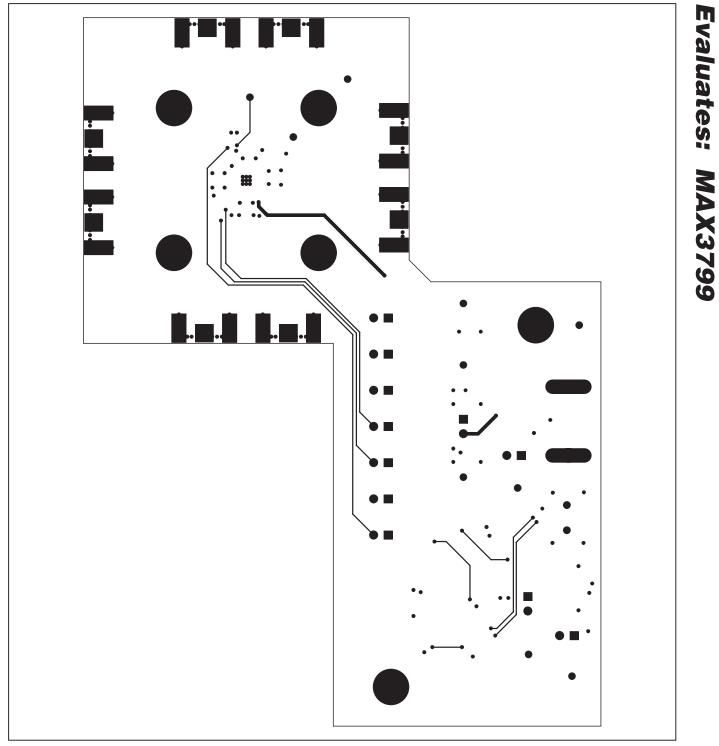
MAX3799 EV Kit PCB Layout—Solder Side
